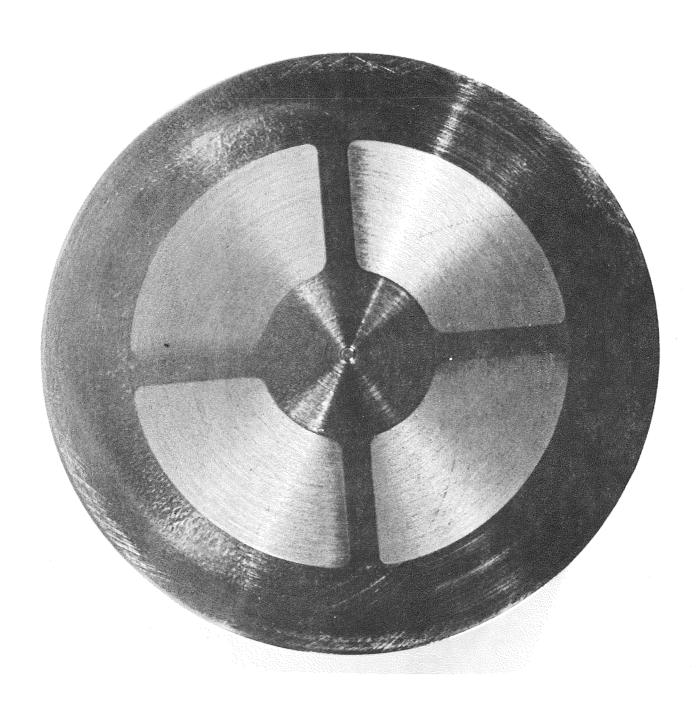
Test Sample After Clean Up Machining - Inlet Eye View
